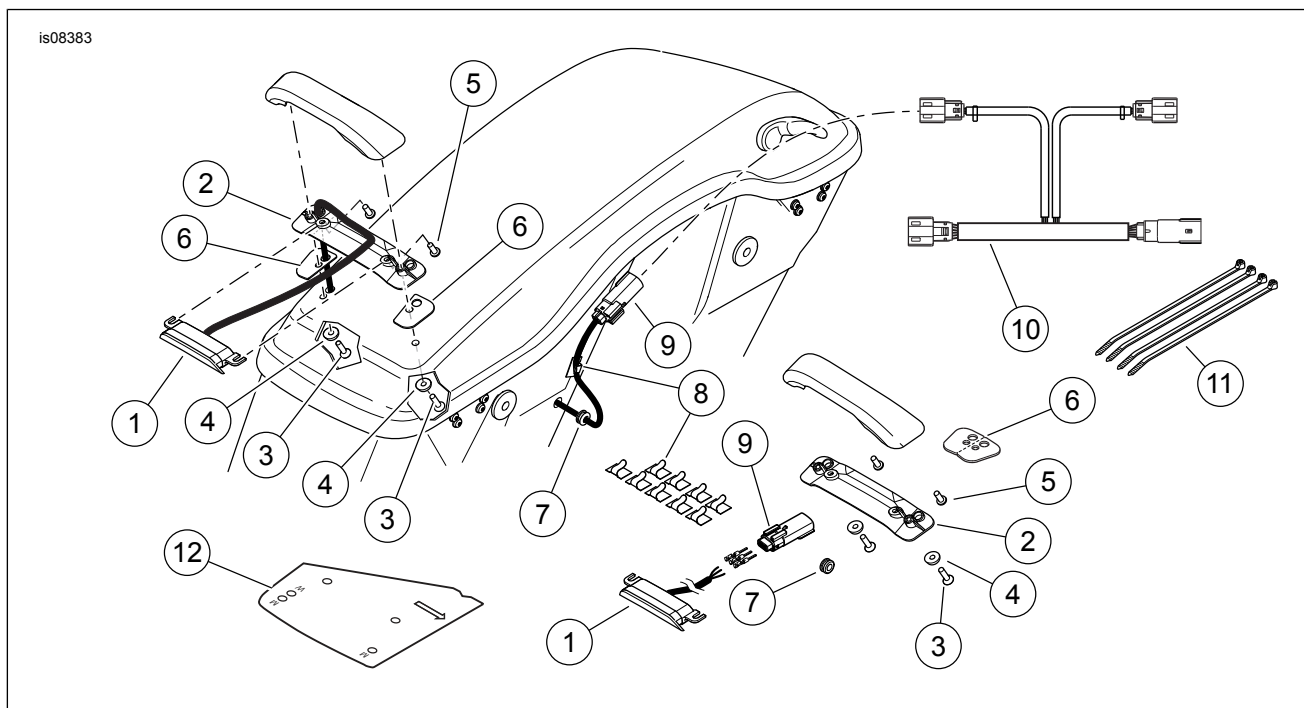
Service Parts, Saddlebag Spoiler and Auxiliary Rear Light Kit
